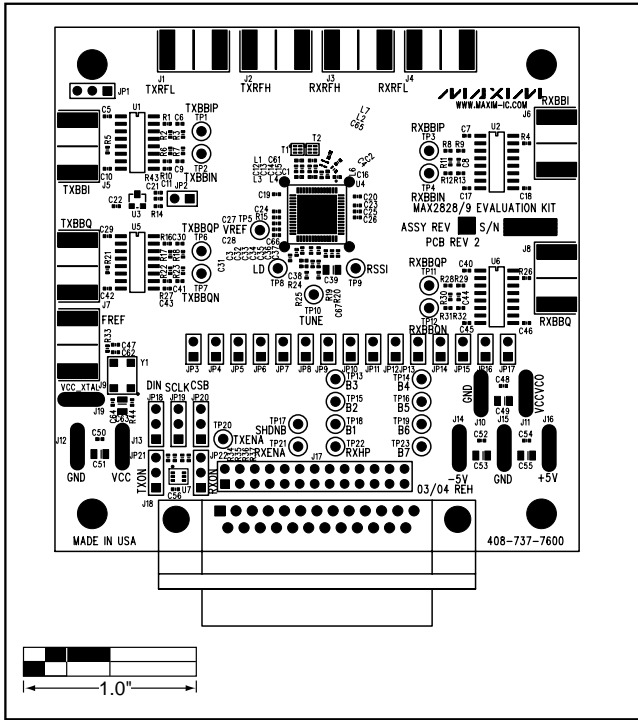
MAX2828/MAX2829 EV Kit PC Board Layout—Top Silkscreen
